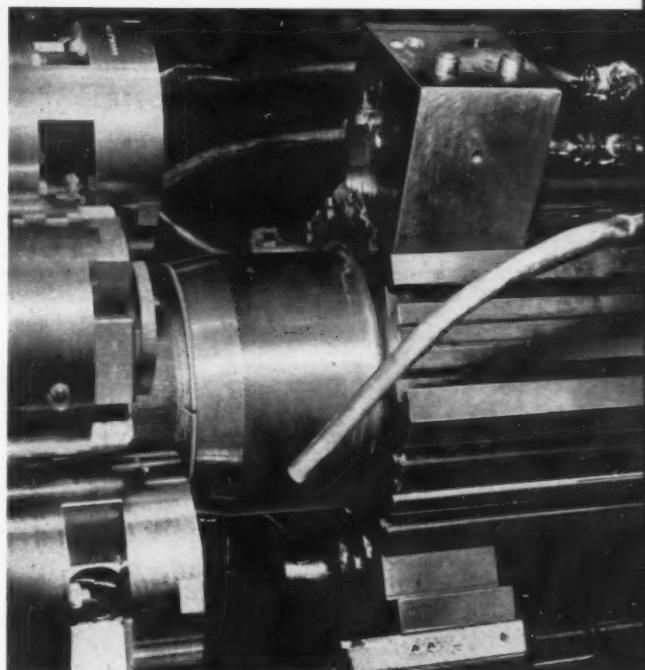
(Above) Grooving tool protrudes from a cartridge type tool-holder. The tool-holder is secured in a tool-block on the main slide of an eight-spindle chucking machine.
